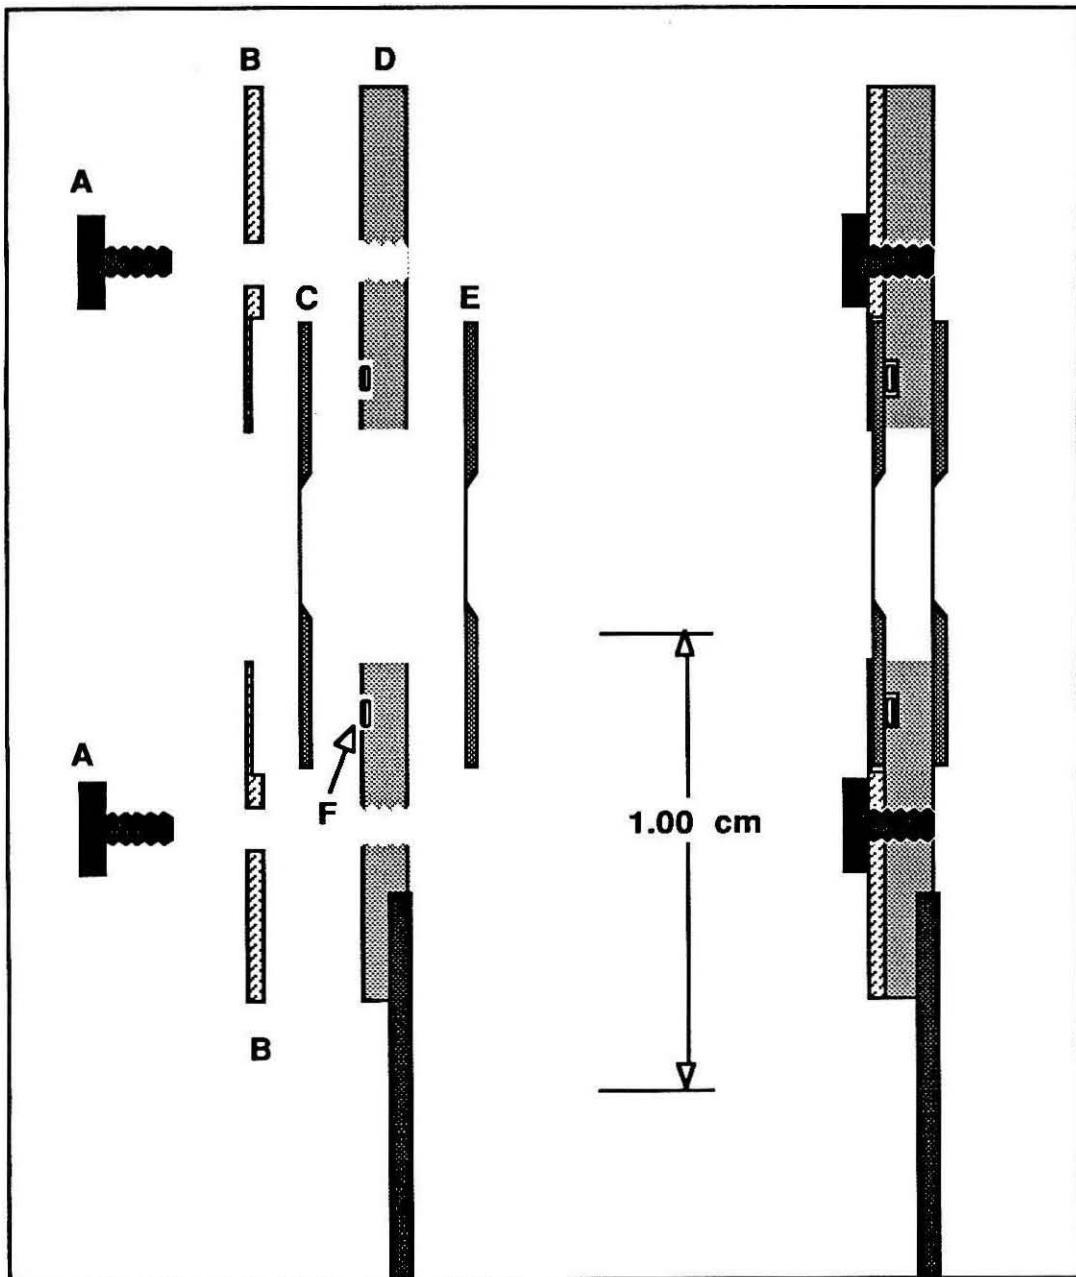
Wet Cell Assembly A two part view of the wet cell assemblage. On the left we have an exploded view of the pieces of the wet cell, and on the right we have the assembled pieces. The drawing is to scale, the scale bar is 1cm. A labels the clamping screws that hold the brass plate and thus the specimen chip to the body of the wet cell. There are 4 of these screws, though only 2 are shown here. B labels the brass plate -- which is one piece, though it appears here as two due to its crosssection. C labels the specimen chip which is held to the wet cell body by the brass plate. D labels the body of the wet cell, which is machined from a 2 cm stainless steel disk 1mm thick. E labels the exit window, which we glue onto the back of the wet cell body. F labels the o-ring, in its groove. The o-ring provides a tight seal between the clamped on culture chip and the body of the wet cell.
